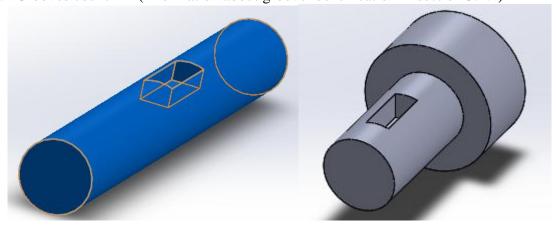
Rotational part with a groove smooth (left) and stepped to one end (right)
